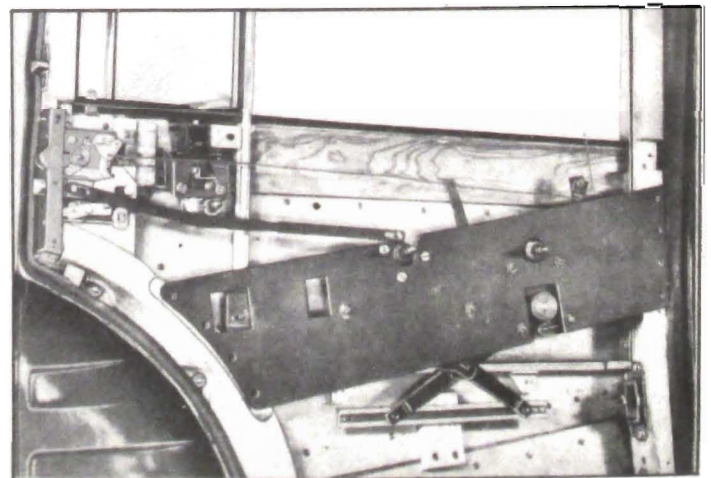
Rear Door with Inside Trim Panel Removed—1948 Models
